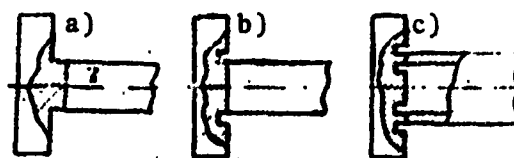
Preparation of the flat part before welding of the T-joint of a plate with a rod (a and b) and the tube (c).
